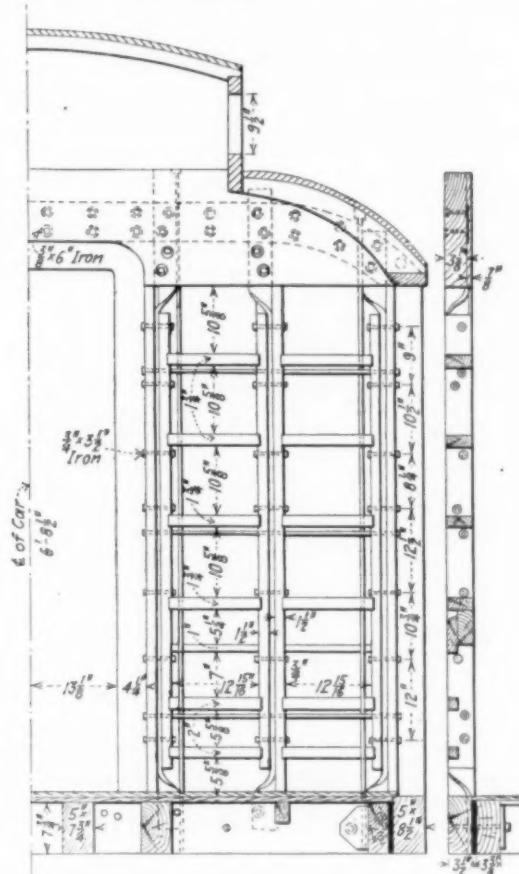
ANTI-TELESCOPING IRON END FRAMING
